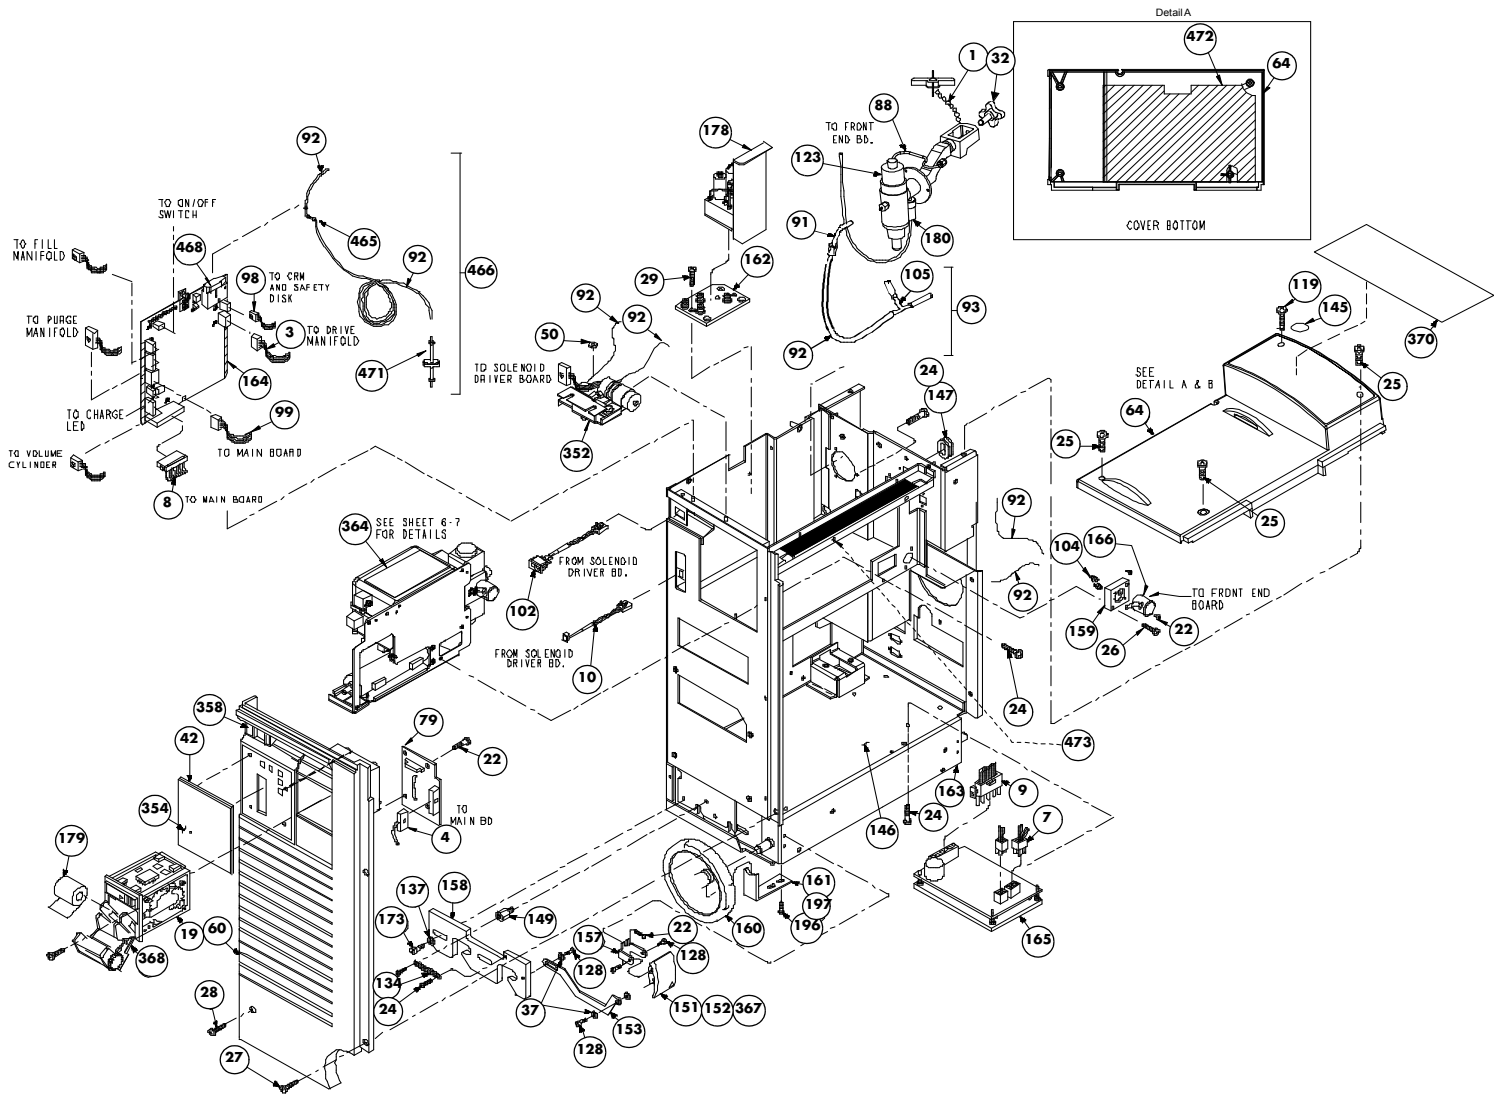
Isometric Drawing, Chassis, Left Side, Top
